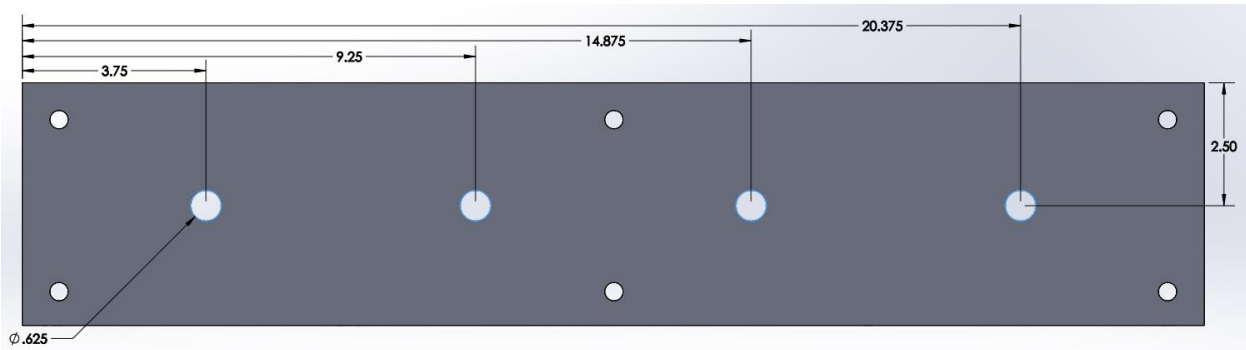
Dimensions for the holes cut on the Front PVC block to allow for the back and forth movement of the plunging rods.
